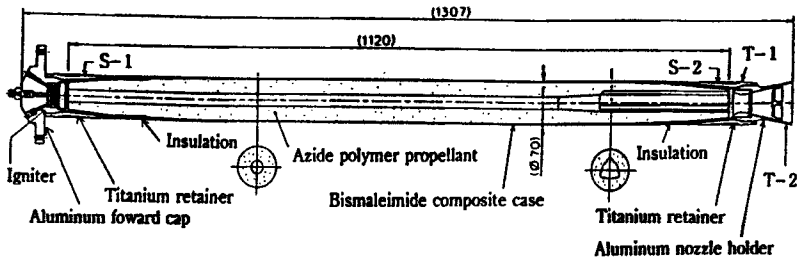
Schematic drawing of the BMI composite rocket motor
